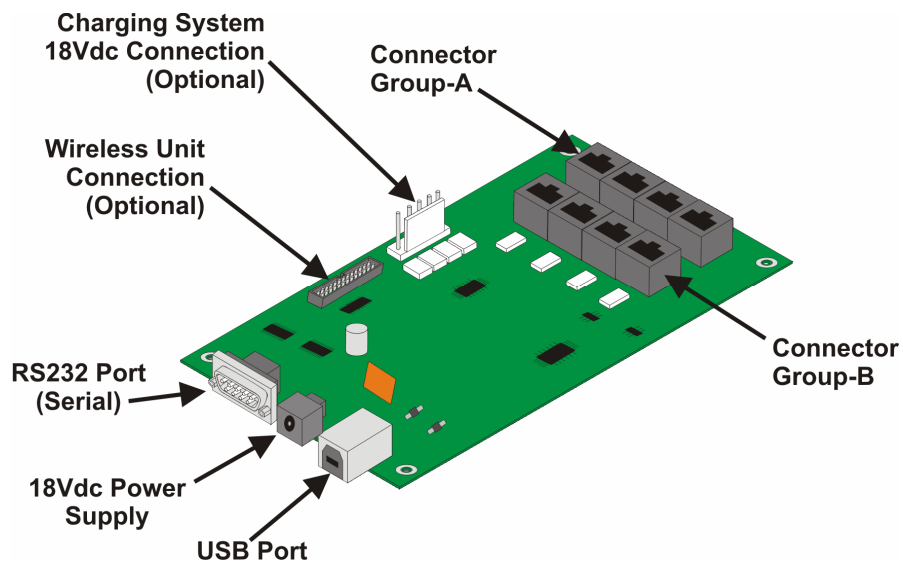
SML Interface Module – Printed Circuit Board Assembly (PCBA)
